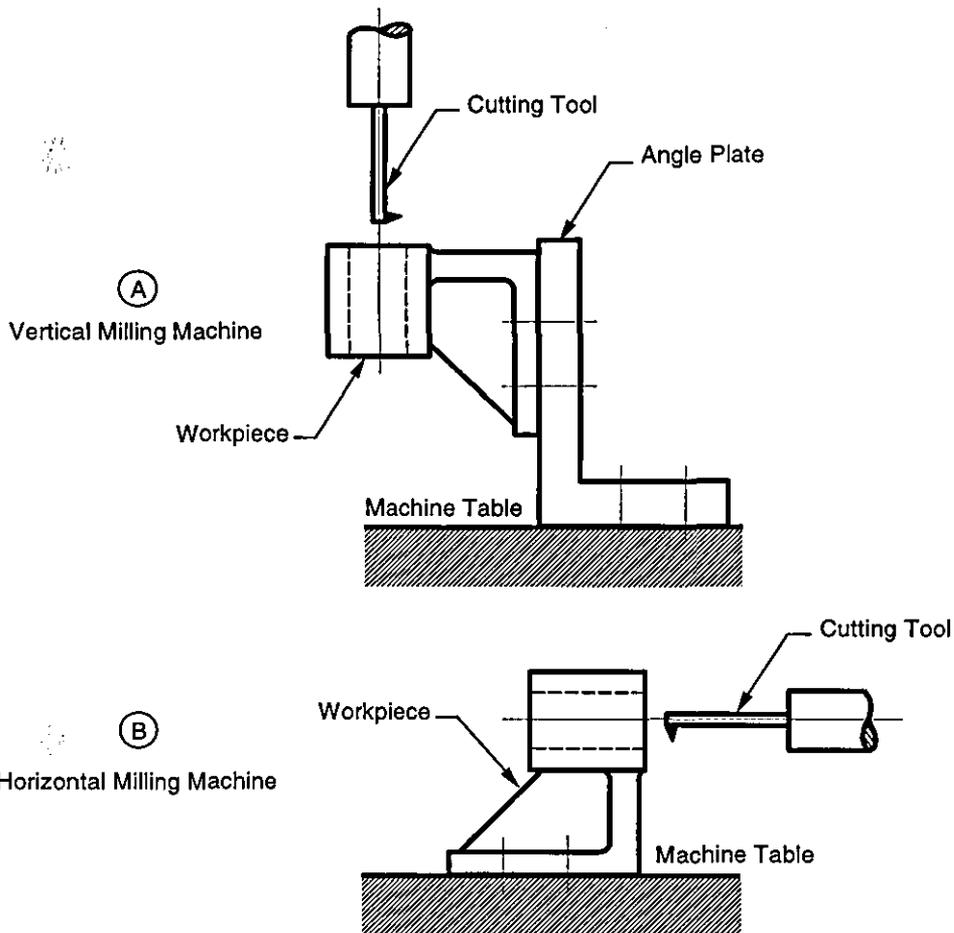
The Vertical and Horizontal Milling Machine Spindle Axes
